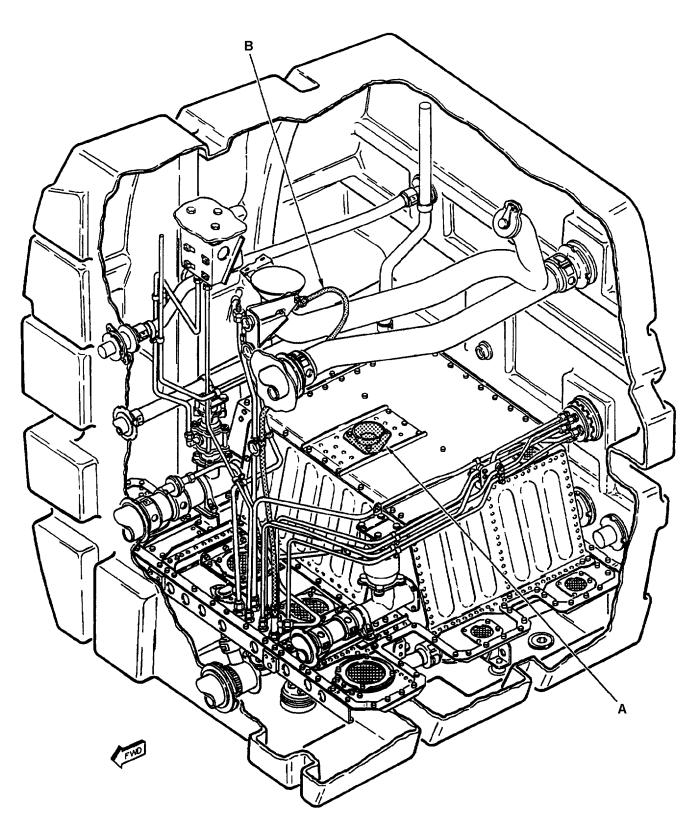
No. 2 Fuel Tank Level Sensor Tube Restrictor (5RAP667) (Sheet 1)
